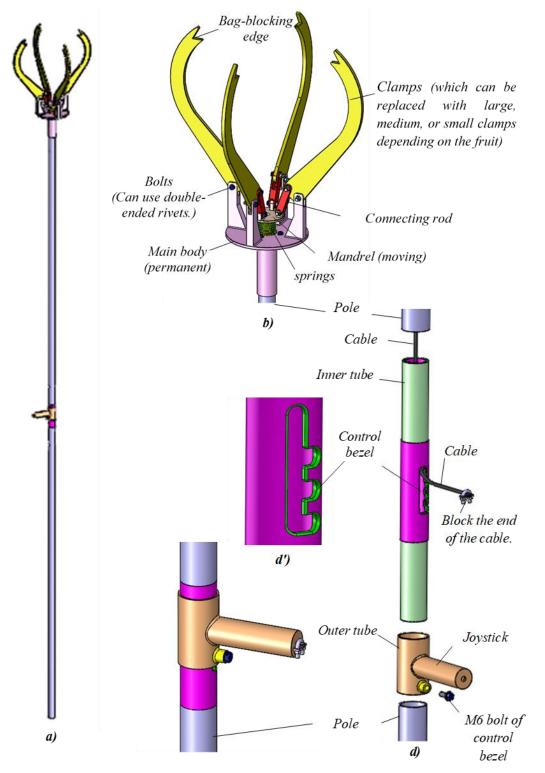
Tool structure with two functions: wrapping bags and picking fruit a) *Overall figure; b) Enlarged figure of the head; c) Enlarged figure of the control part d) Decomposes the control part; d') Enlarge the figure to see the control edge of the inner tube.
